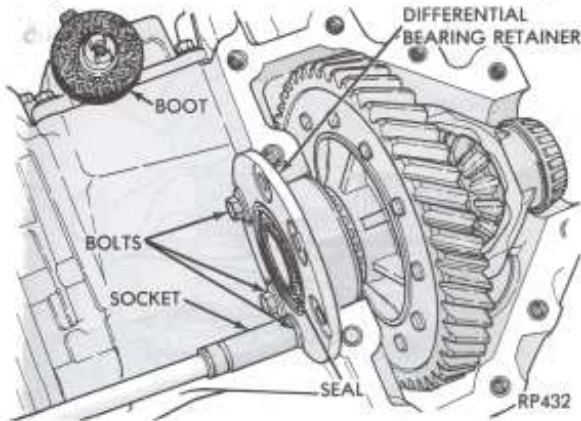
Remove or Install 3 Differential Bearing Retainer Bolts (A-520/A-555)
